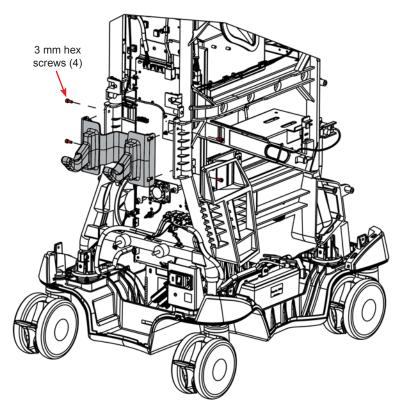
Footswitch Hook Removal (shown with IV Pole removed)
